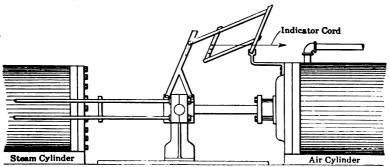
Simple Parallel Reducing Motion as Attached to an Air Compressor.
